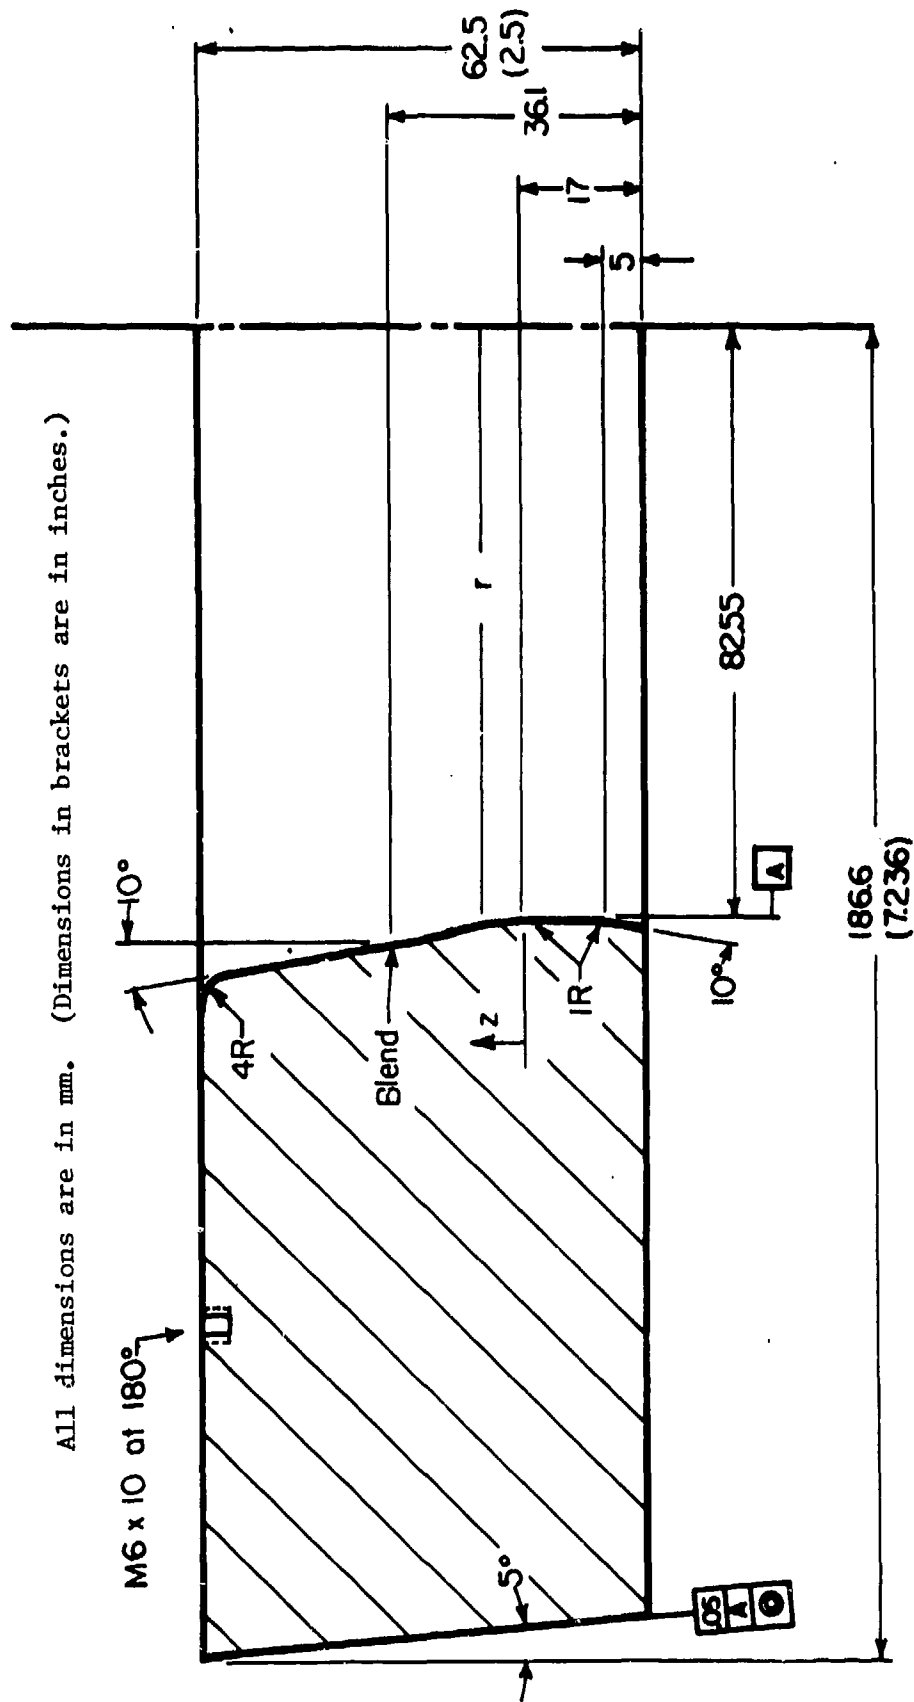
Polynomial die shape for hot drawing of M107 shell (second draw operation).
